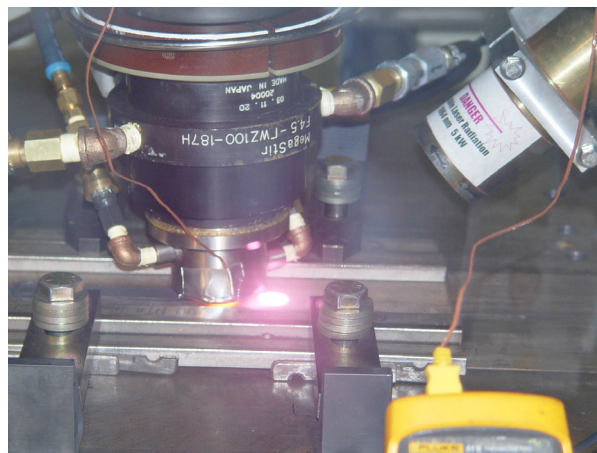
Experimental setup of the externally heated hybrid FSW process: a 4-kW fiber-optically delivered Nd:YAG laser is coupled to the friction stir welding head. Weld is made on SS304 stainless steel.
